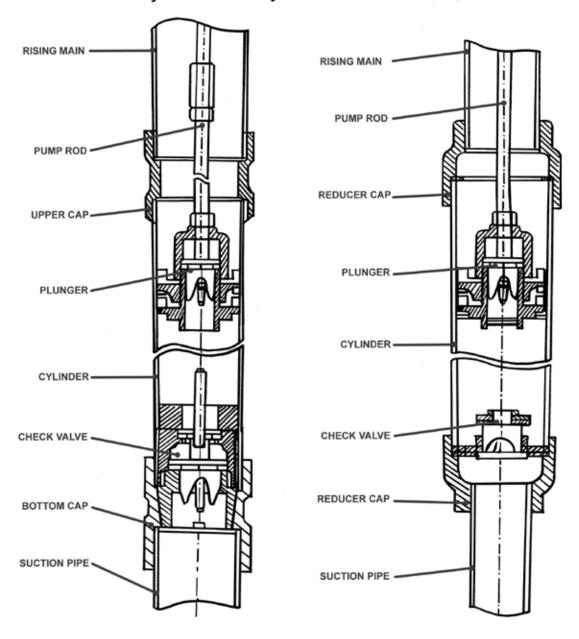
Cylinder assembly for U3 (left) and for U2 (right)
